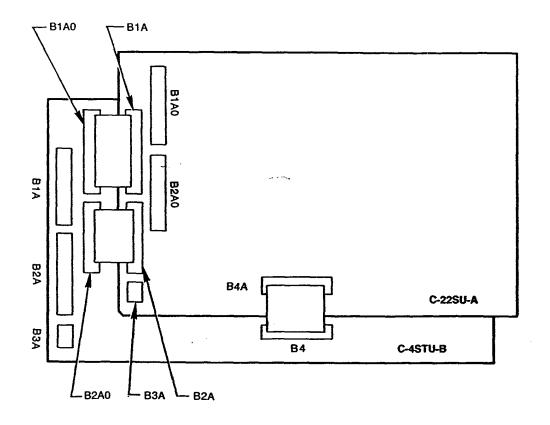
MOUNTING A C-22SU-A ON A C-4STU-B PCB
